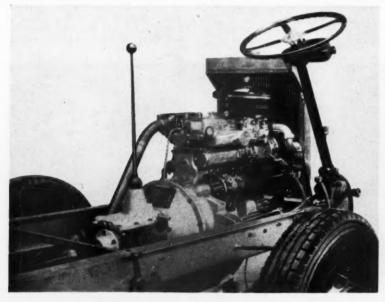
Typical mounting of a 437 gearbox with a Perkins P.4 engine
